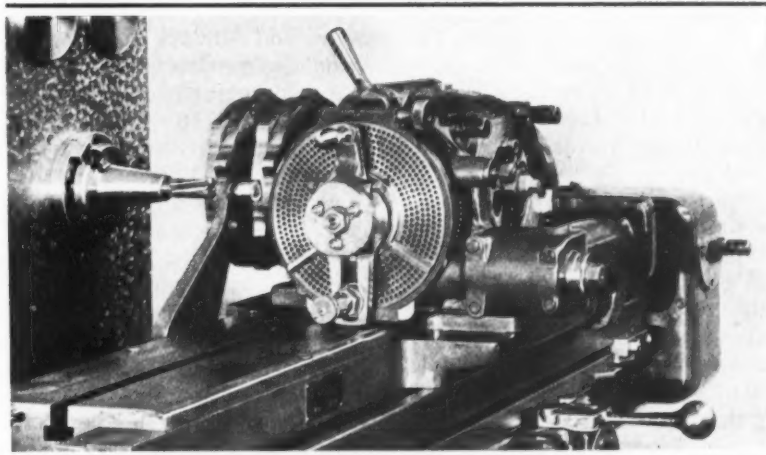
Milling Peripheral Cams with the Spindle of the Cam-milling Attachment Parallel with the Machine Spindle
